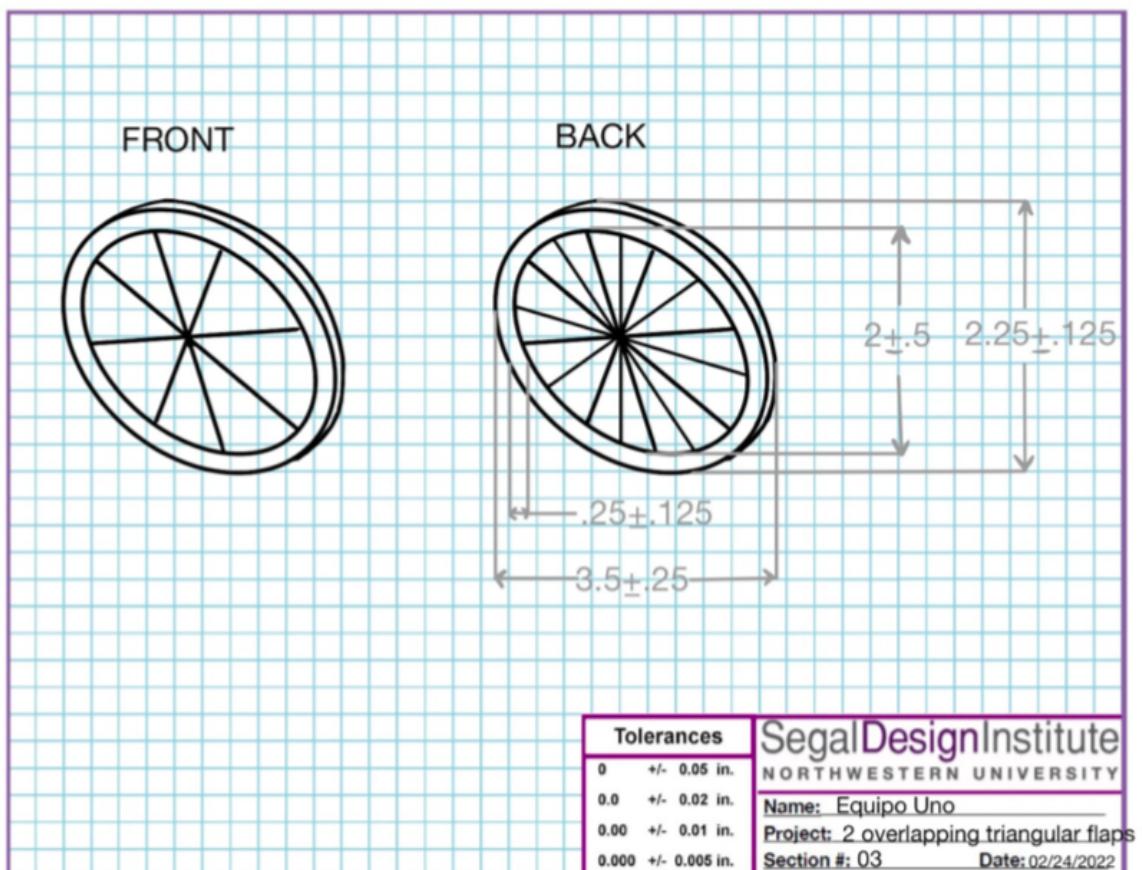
Final design sketch of outer and inner silicone inserts and flaps.
